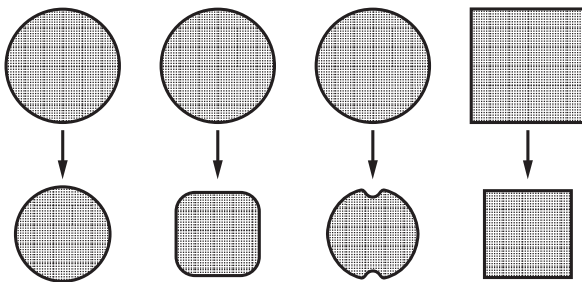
Profile drawing—drawing steps for lubricant assessment.
